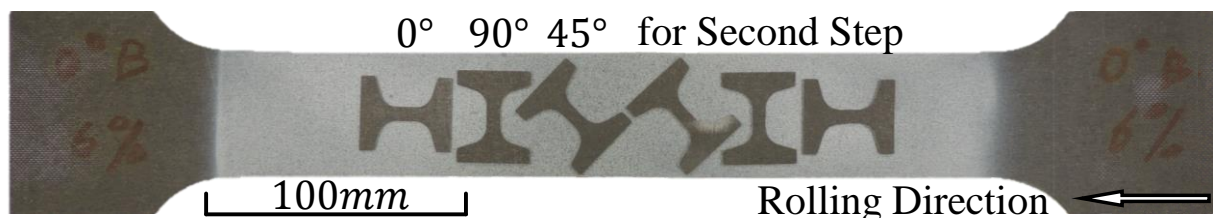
The large-scaled and small-scaled dogbone specimens for two-step uniaxial tension. The small ones were cut from the large specimen based on the assembly. The central area was painted for the purpose of DIC measurement.
